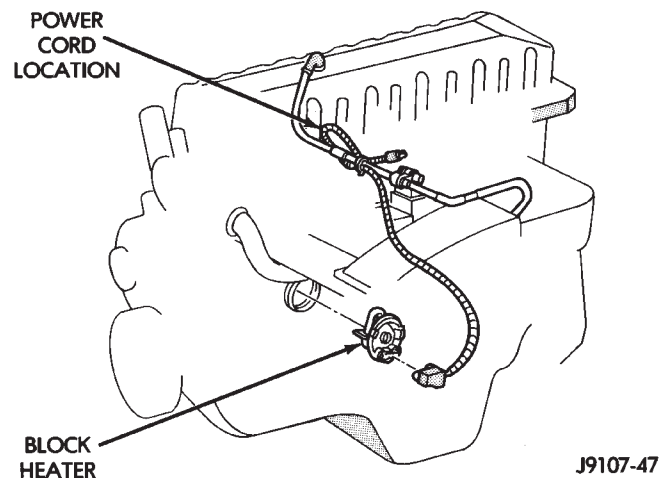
Heater and Cord—XJ with 4.0L 6-Cylinder Engine
